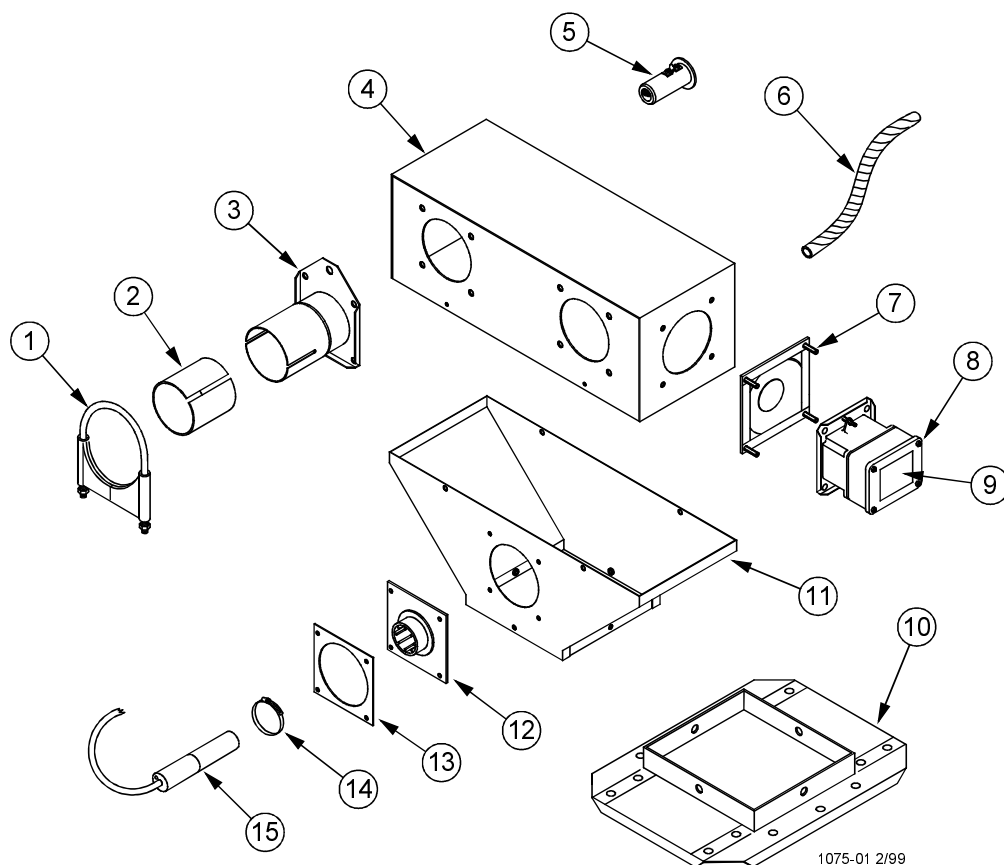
Installing the Hopper Weldment and the Adapter Plate
